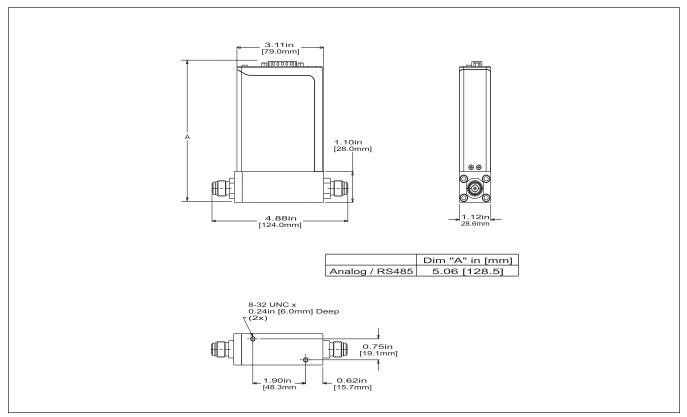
Dimensions - FMA-7400-SS/7500-SS
